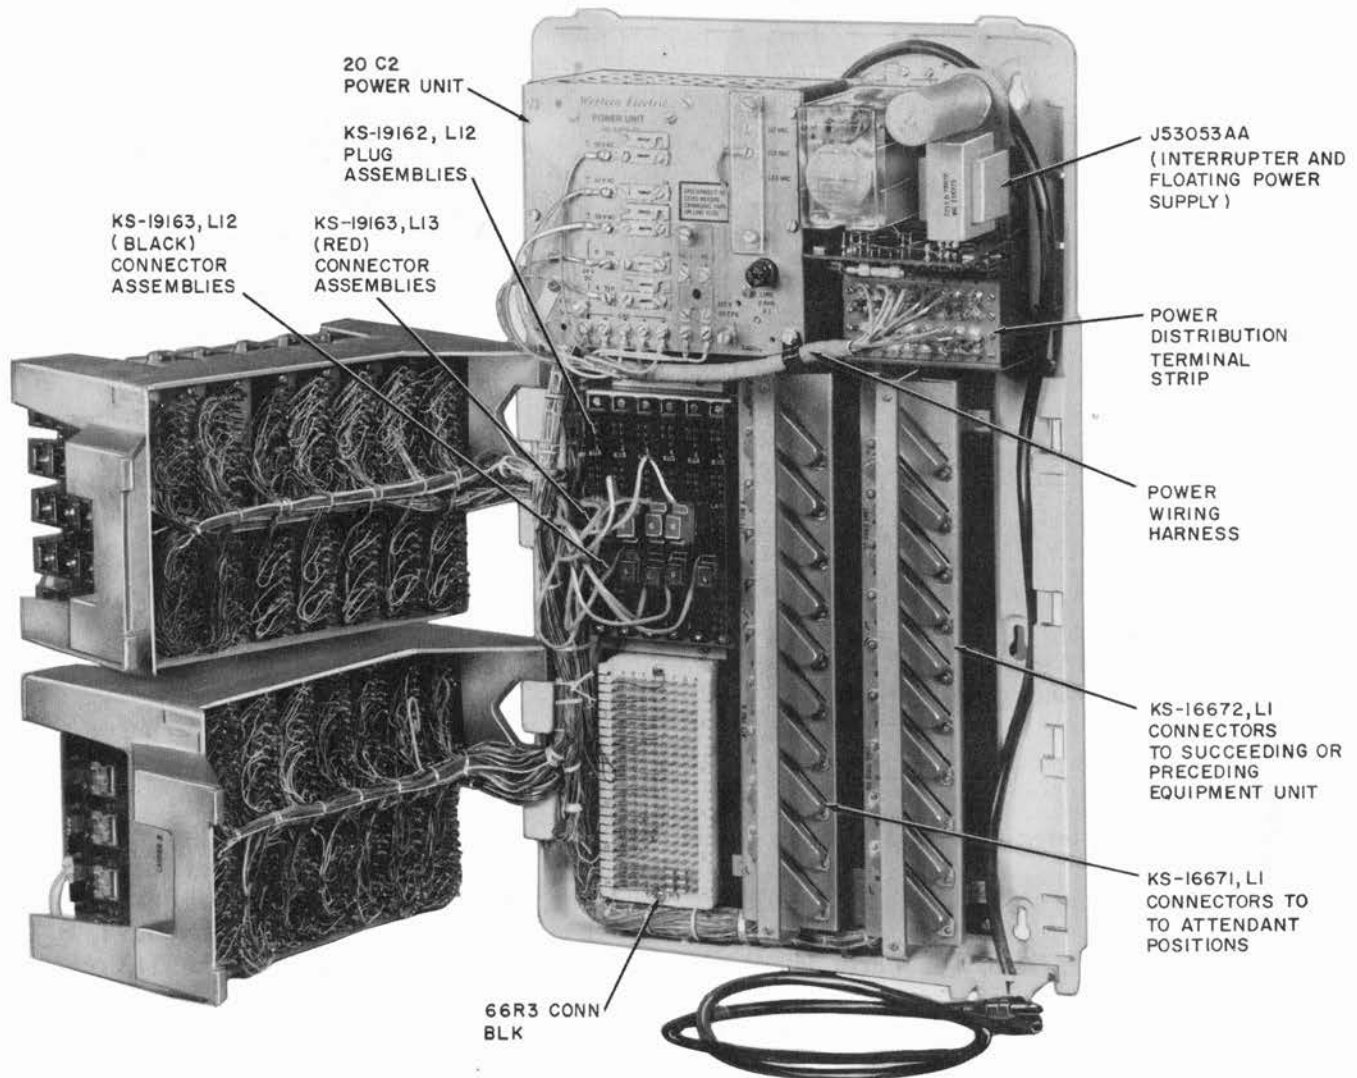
J53053A,L1 Equipment Unit (Carrier Open)
